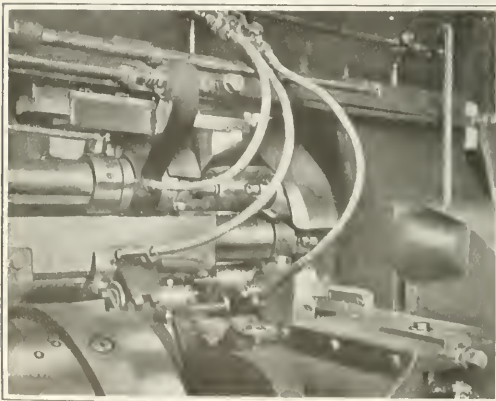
Machining Cartridge Case Primer Body on a Gridley 1½-inch Automatic
